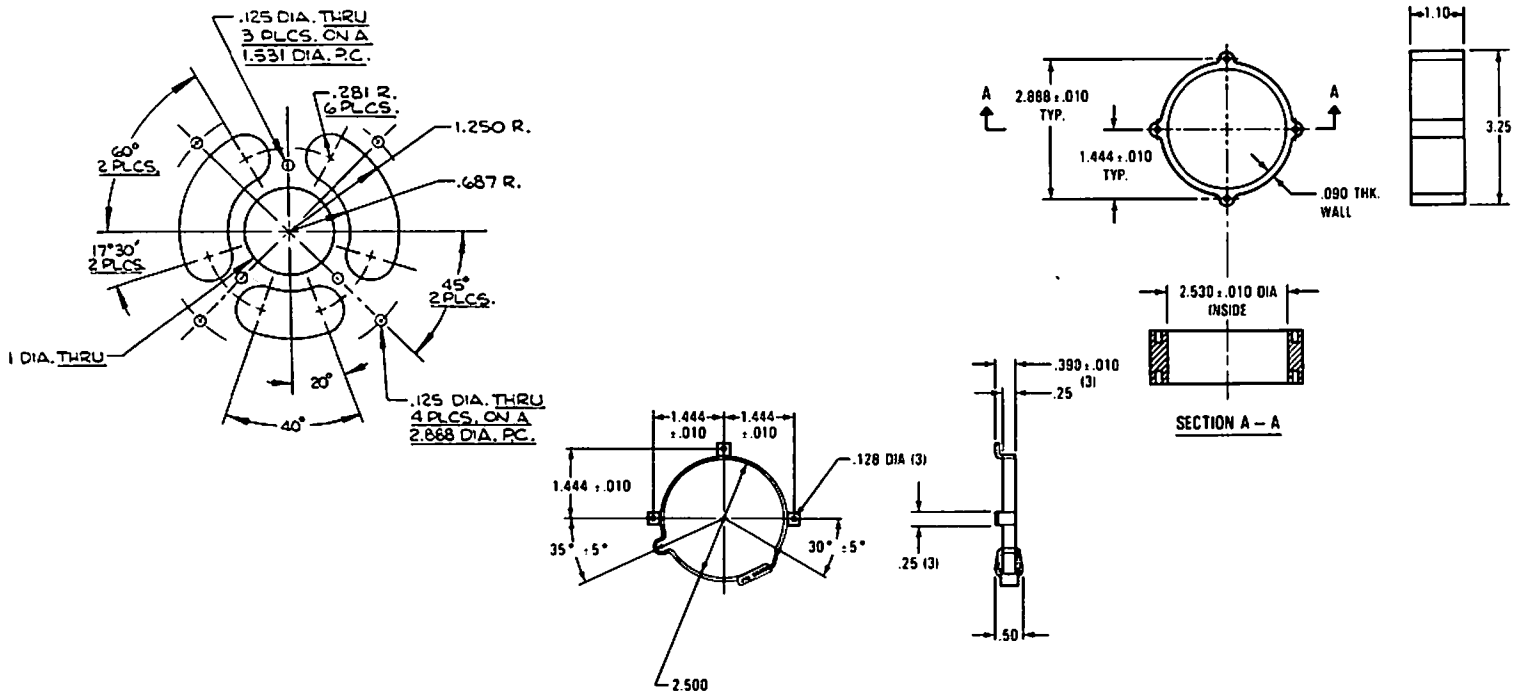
Mounting Plate, Chimney SK-1906 and Clamp SK-1916, for SK-1900 Socket Assembly
